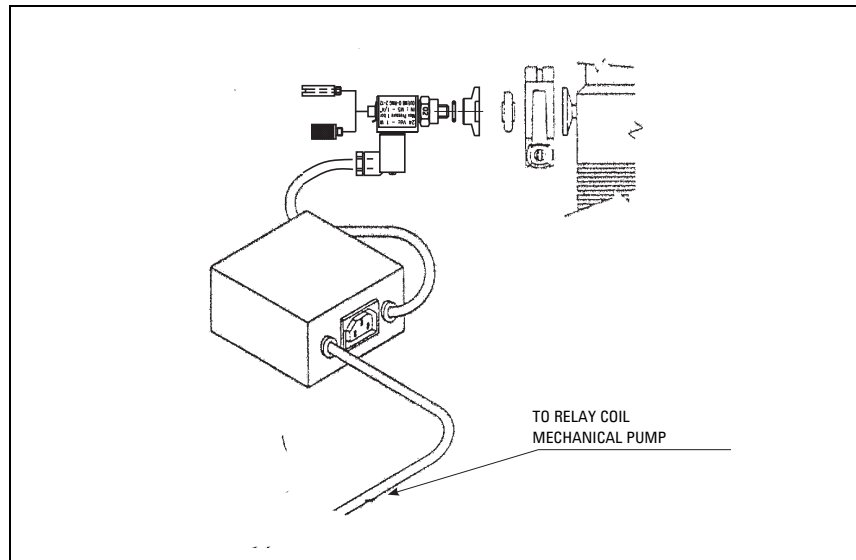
Installation on a Pump not Equipped with a Screw Cap
